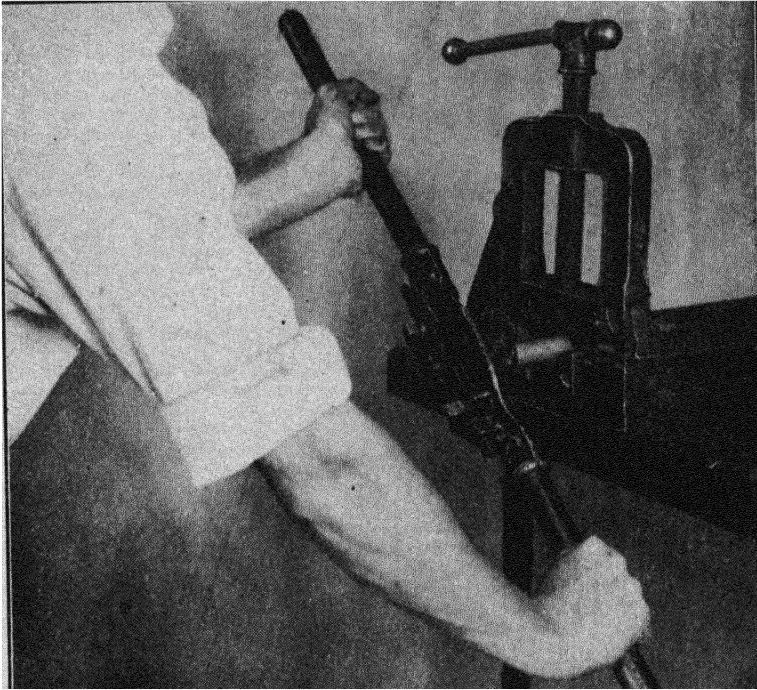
Cutting a thread with a two-handle non-ratchet stock and die.
